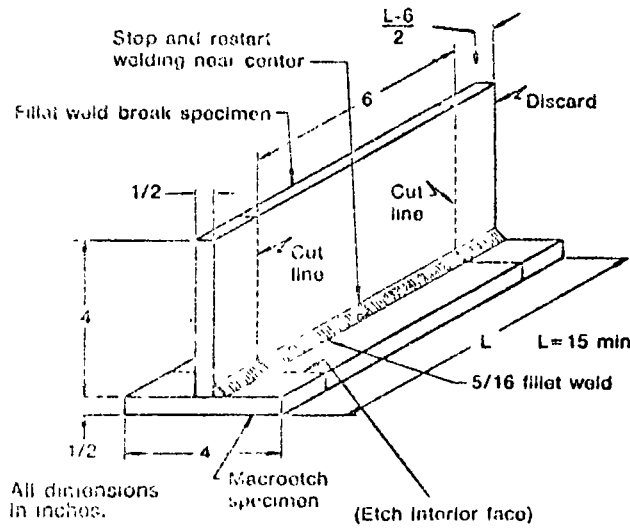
Fillet-weld-break and macroetch test plate—welding operator qualification—option 1.
